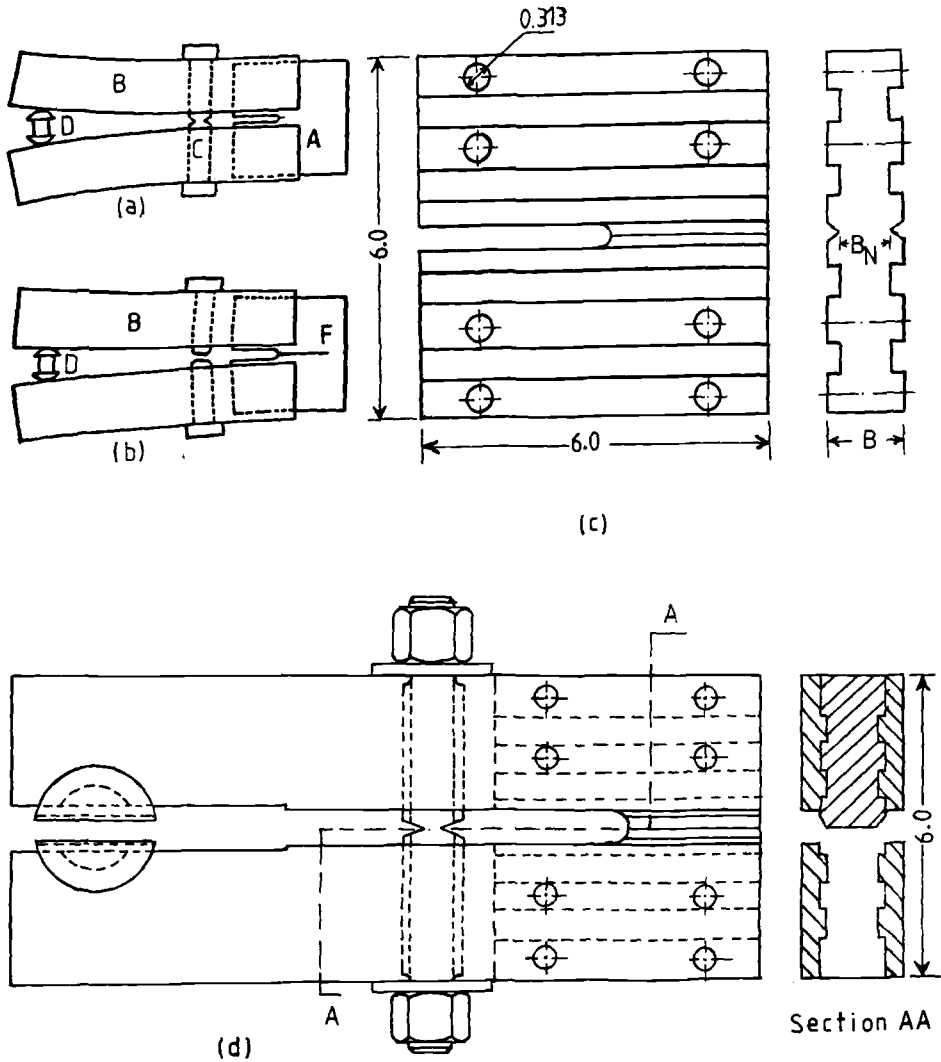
Fast fracture device: (a) and (b) schematic drawing of operation, (c) test specimen, and (d) details of assembly.
